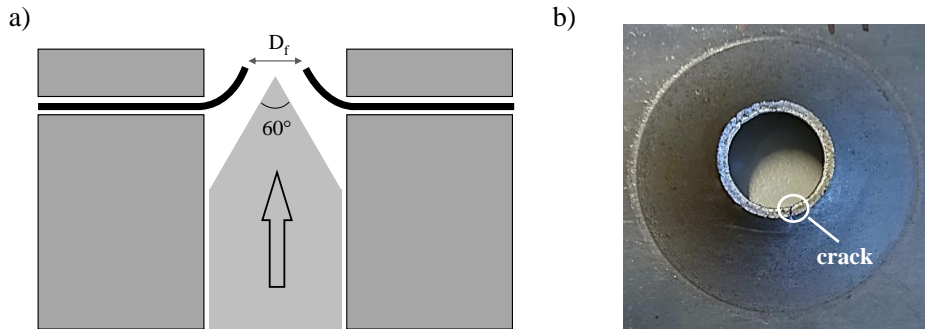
(a) Schema of hole expansion test tool and specimen, (b) Example of specimen after hole expansion test.
